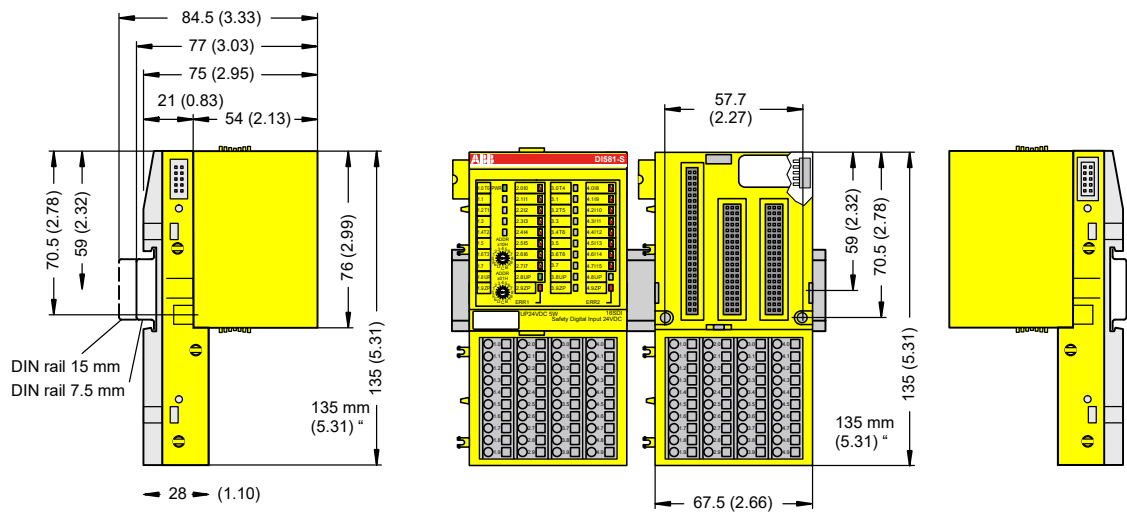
Dimensions of TU582-S safety I/O terminal unit
